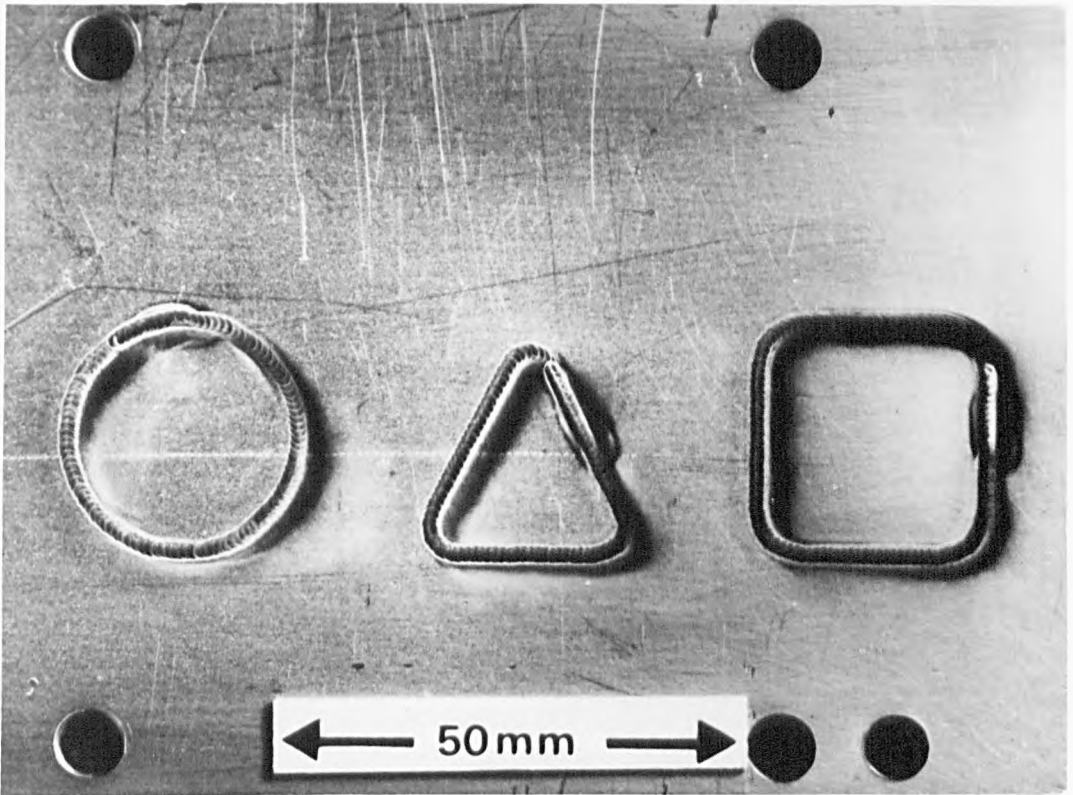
SPECIMEN WELD PATTERNS
